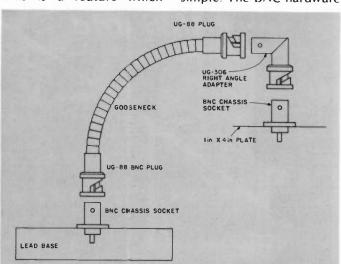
Simple assembly of the holder using BNC connector hardware.
